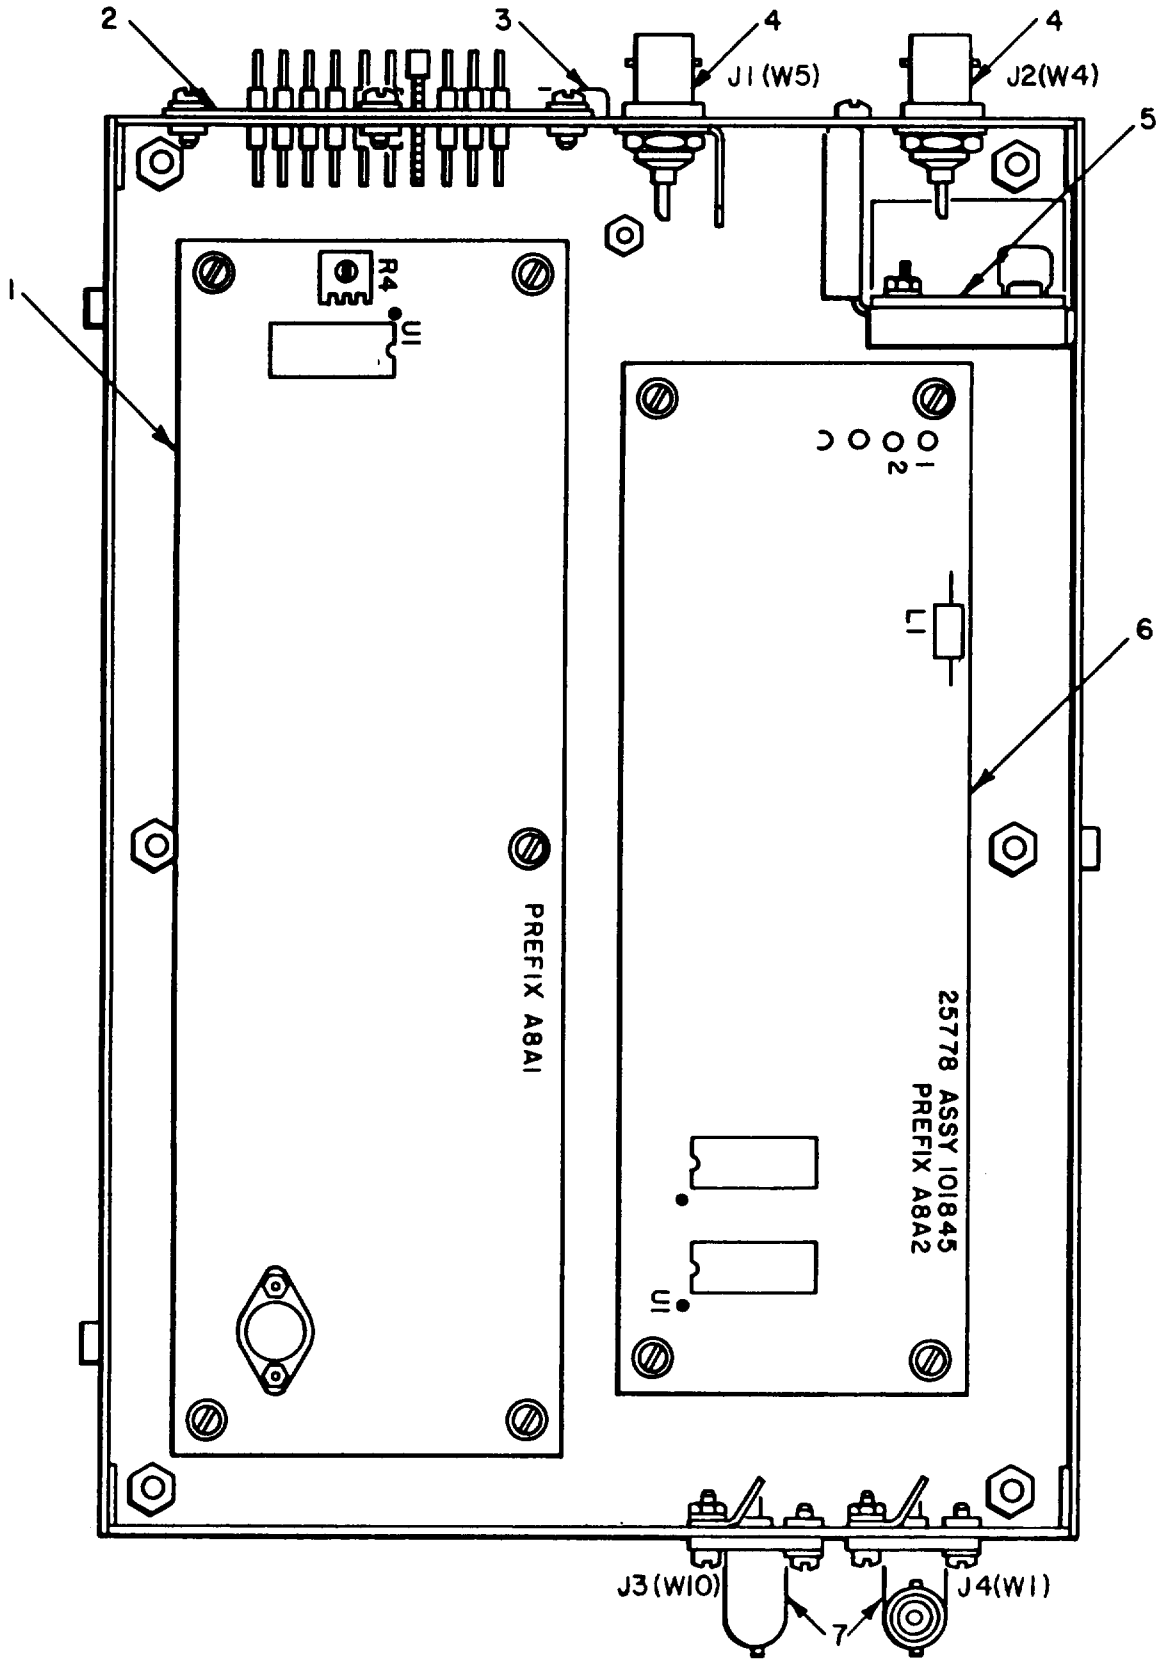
FIXED OSCILLATOR DIVIDER, ASSY. A8-COVER REMOVED
